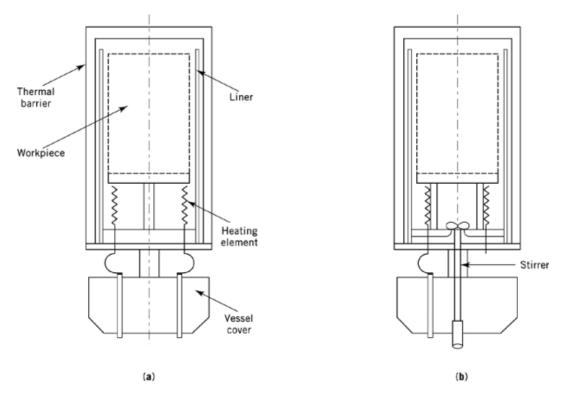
(a) Workpiece heated by natural convection; (b) workpiece heated by forced convection (80).
